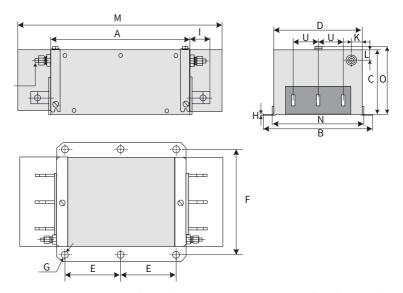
Dimensions of Schaffner FN 3359 series 150–2500 A filter (unit: mm)
